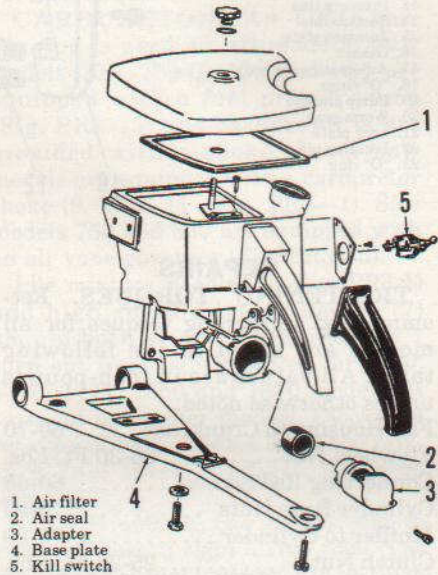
Exploded view of fuel tank, air box and rear handle typical of later models.
